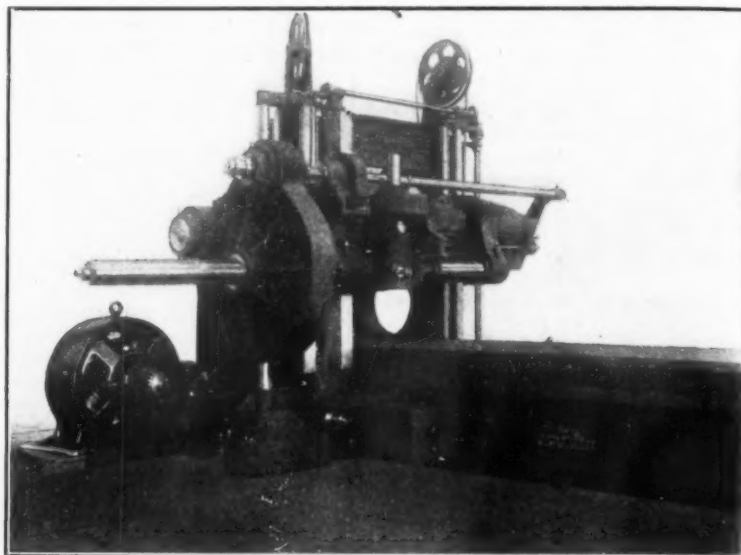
ELECTRIC-DRIVEN MILLING MACHINES.
